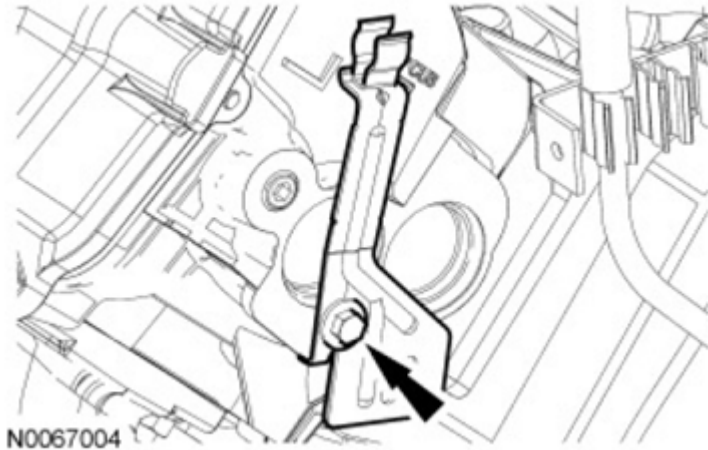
Locating Intake Manifold Vacuum Tube Support Bracket And Bolt
